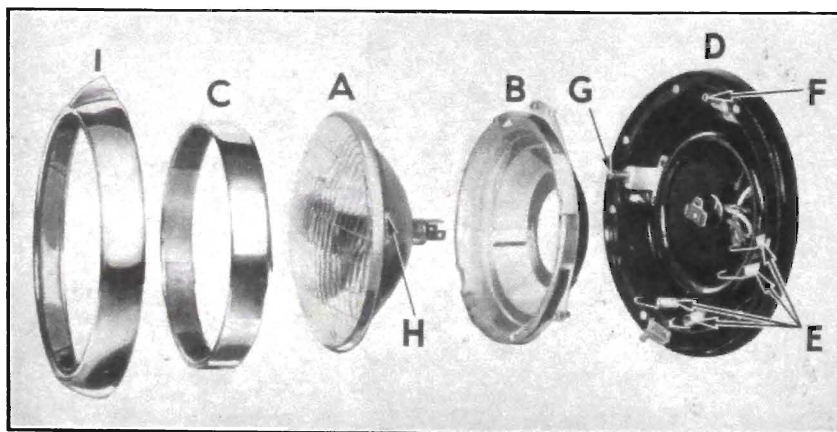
Sealed Beam Headlamp Unit (Exploded View)
